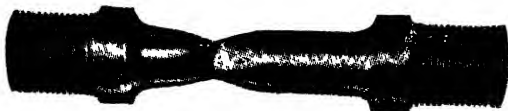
SHAPE OF MILD STEEL TENSILE TEST SPECIMEN AT FRACTURE
